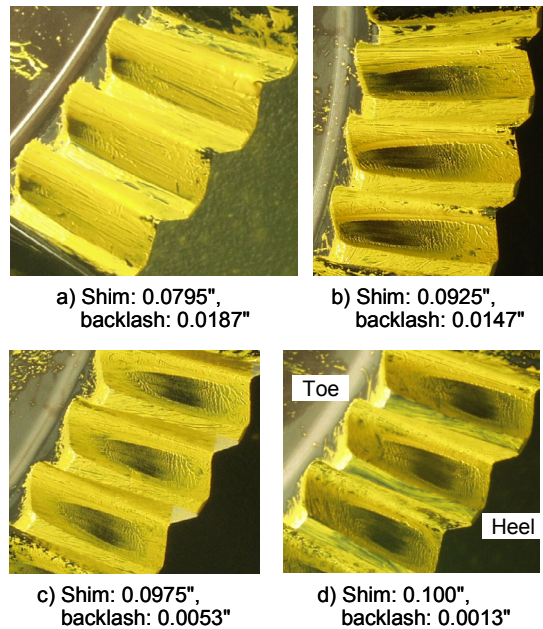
Effect of face gear shim on contact pattern and backlash (all photos shown are face gear patterns).
